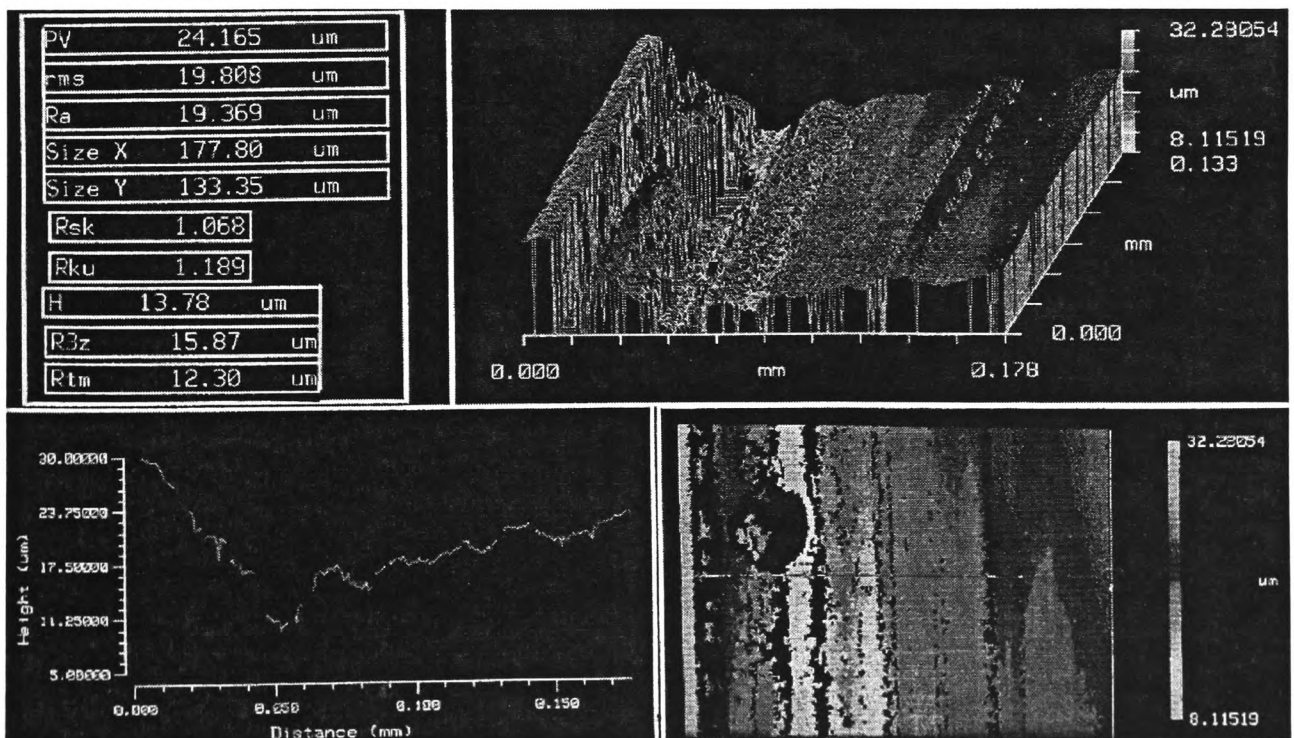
Depth of surface damage on the ground surface at 128.7 μm depth of cut, 26 m/s wheel speed, 5 mm/s table feed, D126 grit size resin bonded wheel and -0.3 grinding wheel/truing speed ratio. Grinding with artificial crack on the surface.
